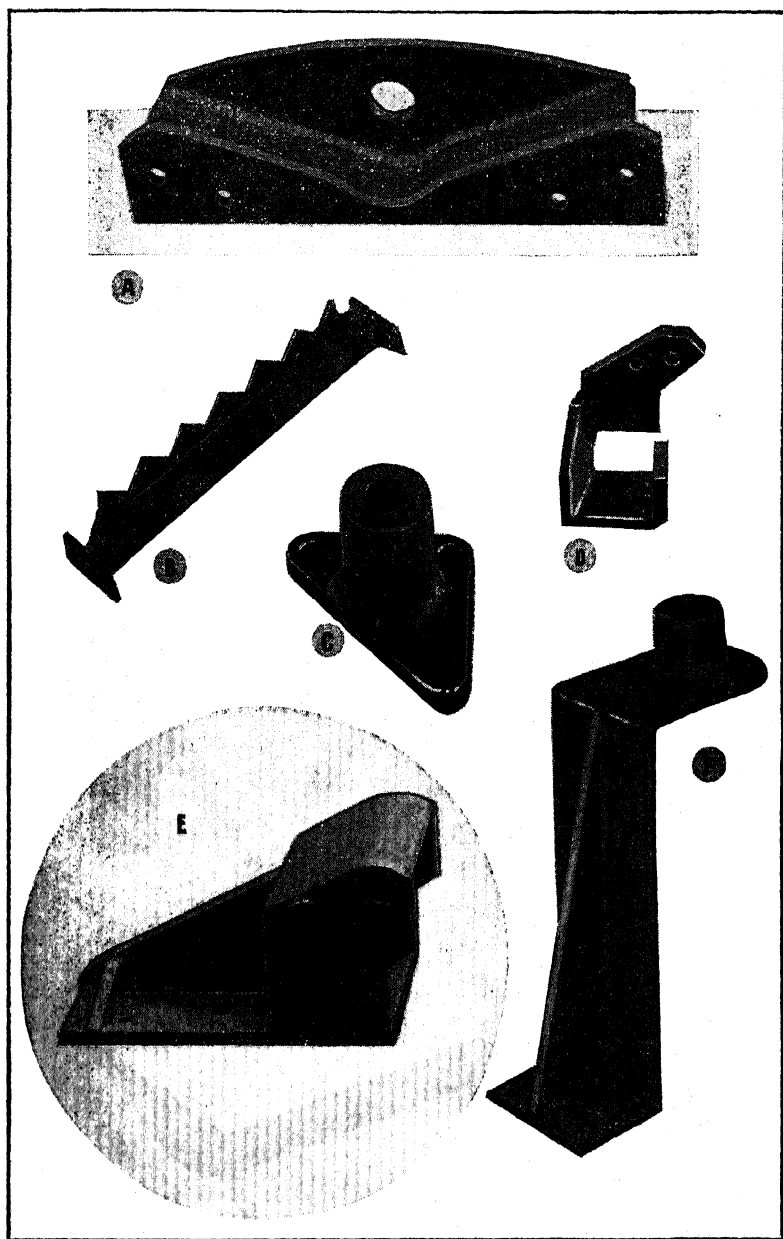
BRACKETS—(A) Adapter for locomotive bumper. (B) Flight for conveyor. (C) Brake hanger support. (D) Bracket for clutch hoist. (E) Bracket for paper machine. (F) Air cleaner support bracket.
